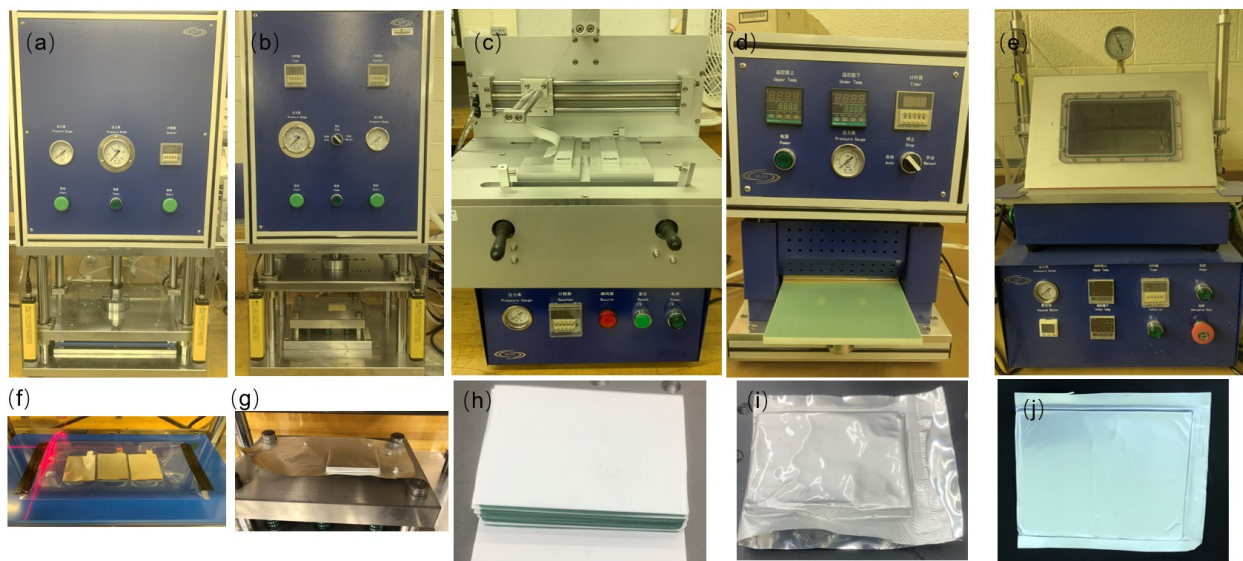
Z-folded dummy cell assembly line following the size of a H605060 LIB: (a) Die cut machine, (b) Al laminated film stamping machine, (c) ESC folding machine, (d) Heat sealing machine, (e) Vacuum sealing machine, (f) Trimmed Al foils, (g) Stamped Al laminated film, (h) Folded dummy ESC, (i) Dummy cell with one side edge and the top edge heat sealed, and (j) Vacuum sealed dummy cell.
